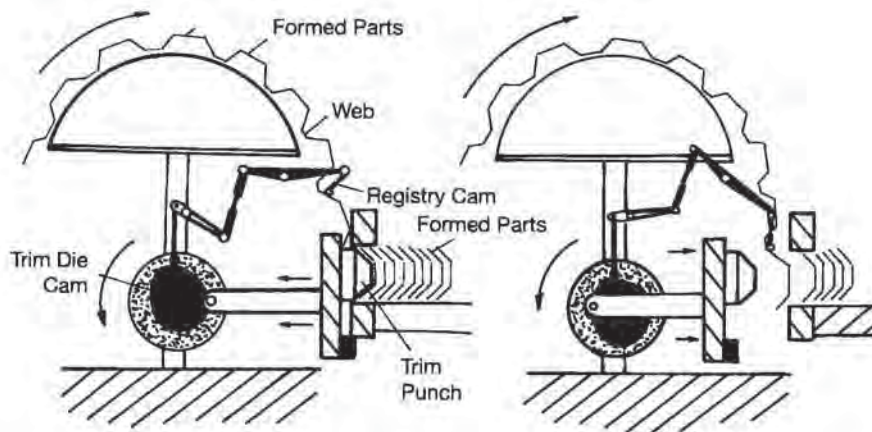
Camel-back or hump-back in-line roll-fed former trimming press with cam-operated punch-and-die trimmer. Figure redrawn from [27]
